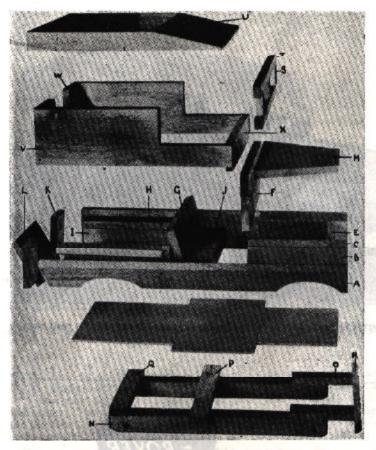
DETAILS OF MAIN COMPONENT PARTS
